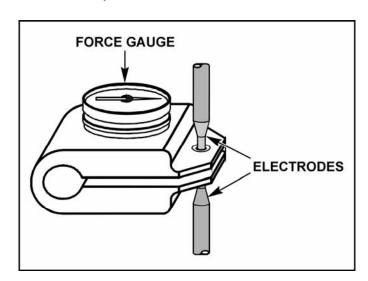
Measuring Preset Firing Force of the Weld Head with a Force Gauge
